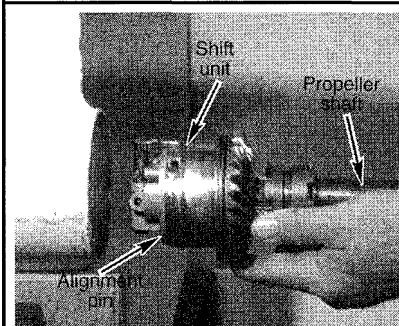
Install the propeller shaft into the gearcase with the detent lever toward the top...
